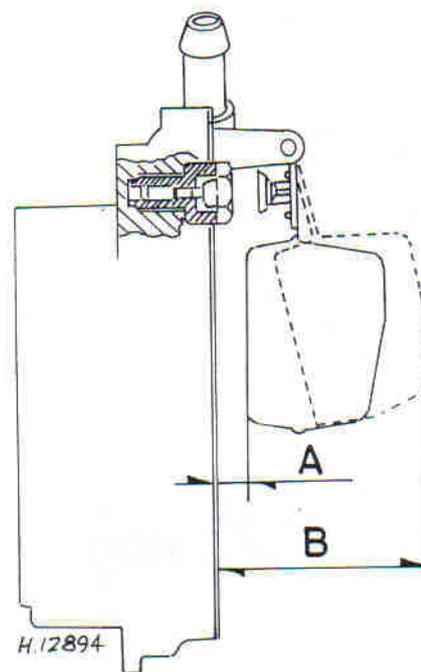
Float setting diagram for Weber 30/32 DMTR carburettor (Sec 15)
